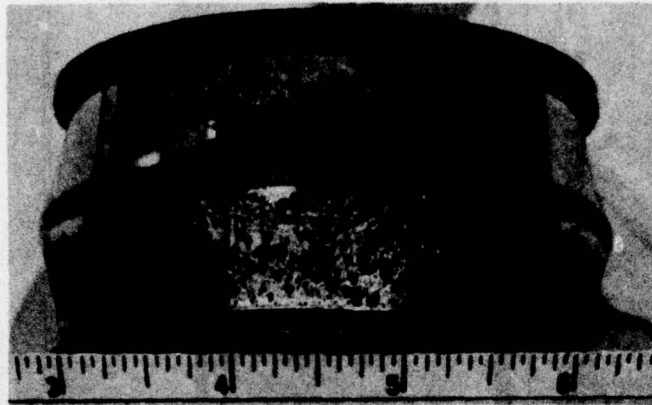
Spalled Inner Race of the 114DS282 Planet Assembly.
